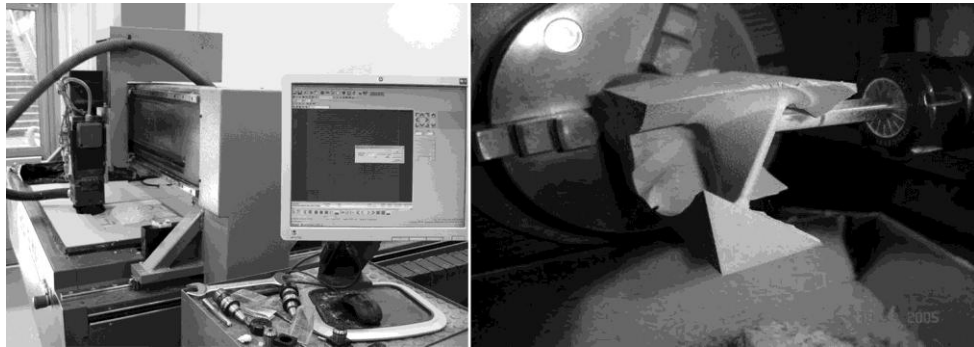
(a) 3-axis CNC milling machine (b) 5-axis vertical milling machine (Mahanoy, 2008).
